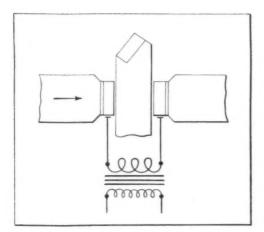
Preferably, the heating equipment for raising the tool to the required temperature prior to and during grinding should be incorporated in the machine. This diagram shows a resistance heating set-up with a pair of insulated vice jaws
